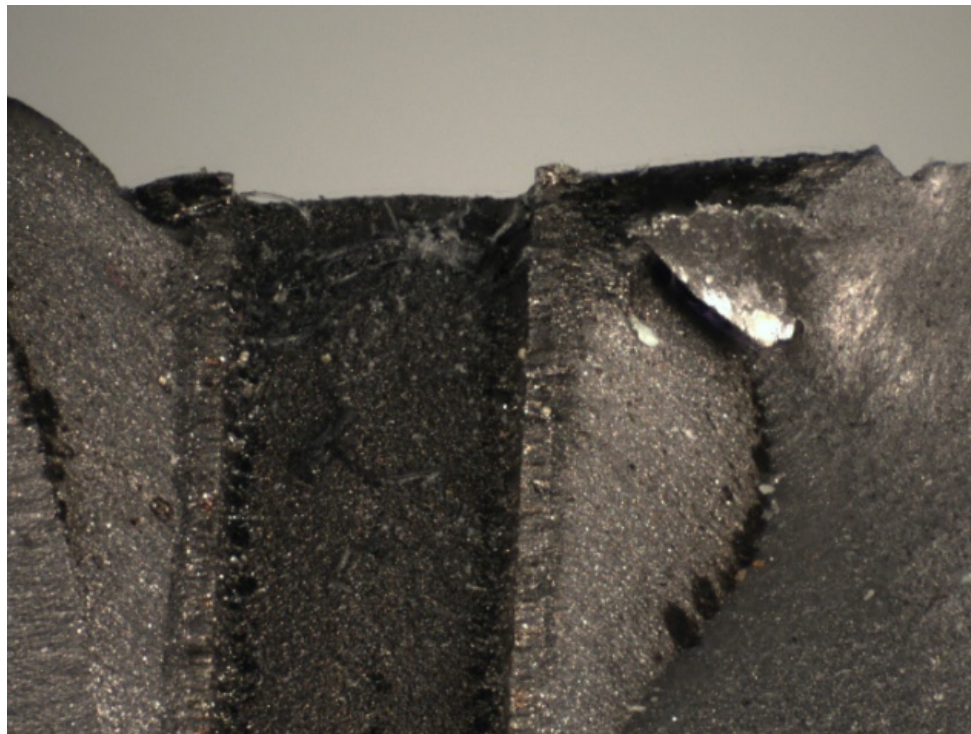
Side view of tensile crack (lower right) tunneling below a shear crack (upper right) in left-back quadrant of bottom half of ITCR #1.
